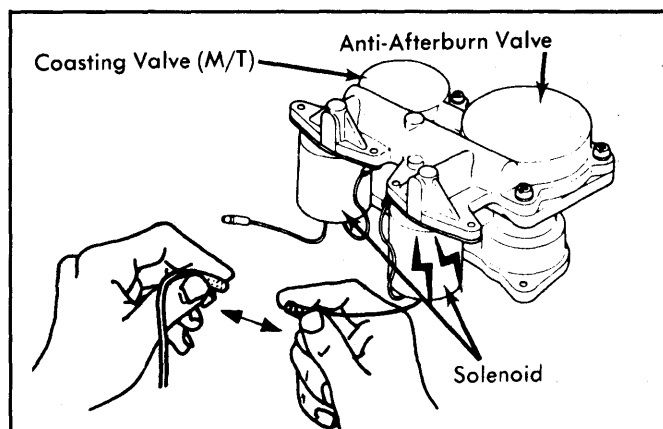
Disconnecting Anti-Afterburn Valve Solenoid
